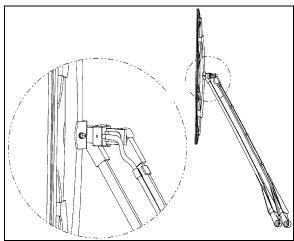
WINDSHIELD WIPER (MOTOR SIDE)
